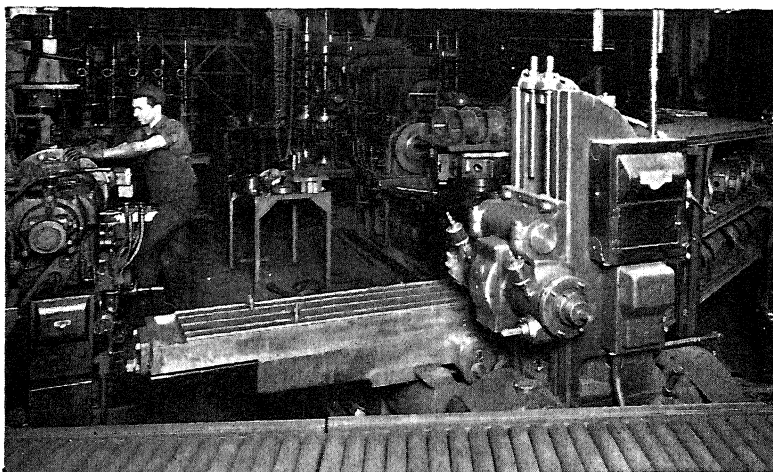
Multiple machine setup for machining electric-motor frames.
